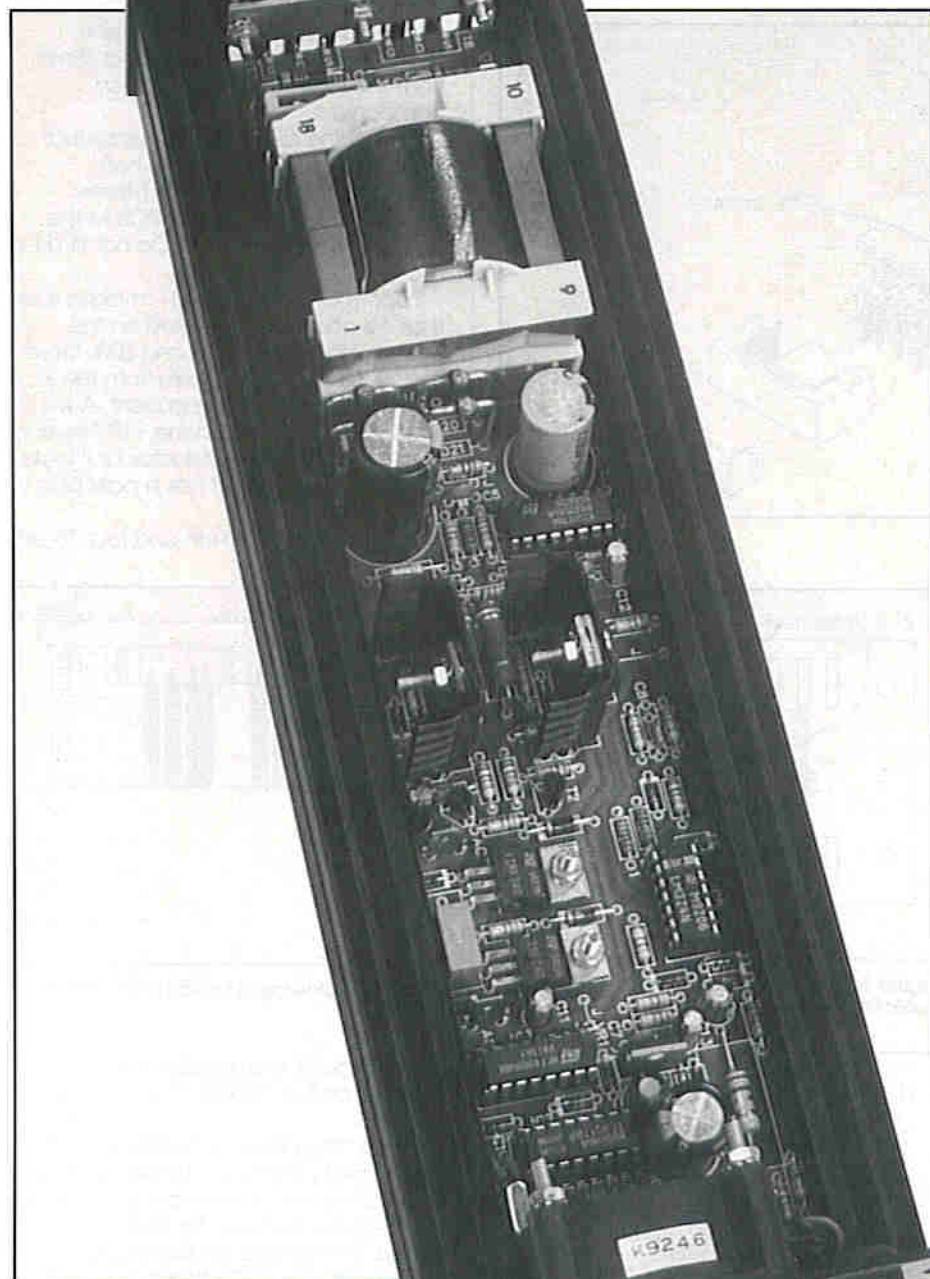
The assembled 12V DC/230V AC Inverter PCB located in its case.
